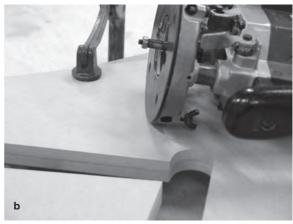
& b Further router jigs can now be produced quickly and easily by using the original jig and a bearing-guided trimmer.
